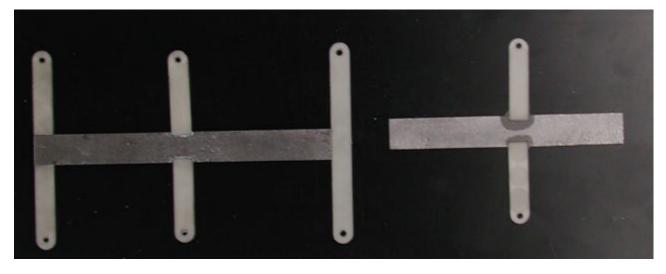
TPG/AIN joints. From left to right: Simple butt joint; joint with step-like profiling of TPG and AIN; fully profiled baseline joint; butt joint in TPG cut-out (the TPG bar is 12mm wide)
